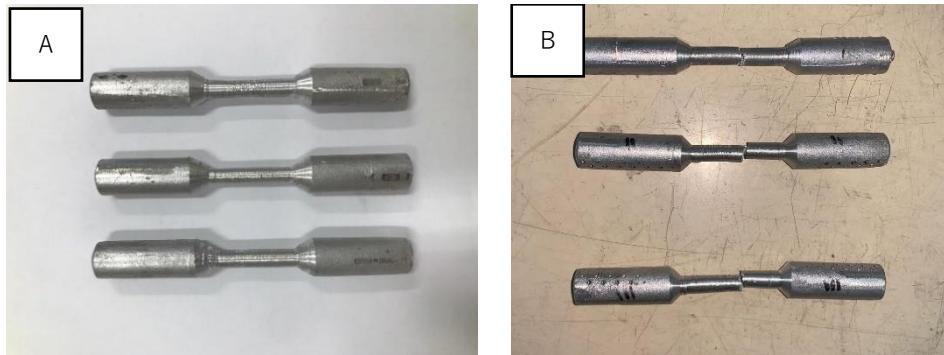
Tensile specimens; (A) Before testing, (B) After testing
